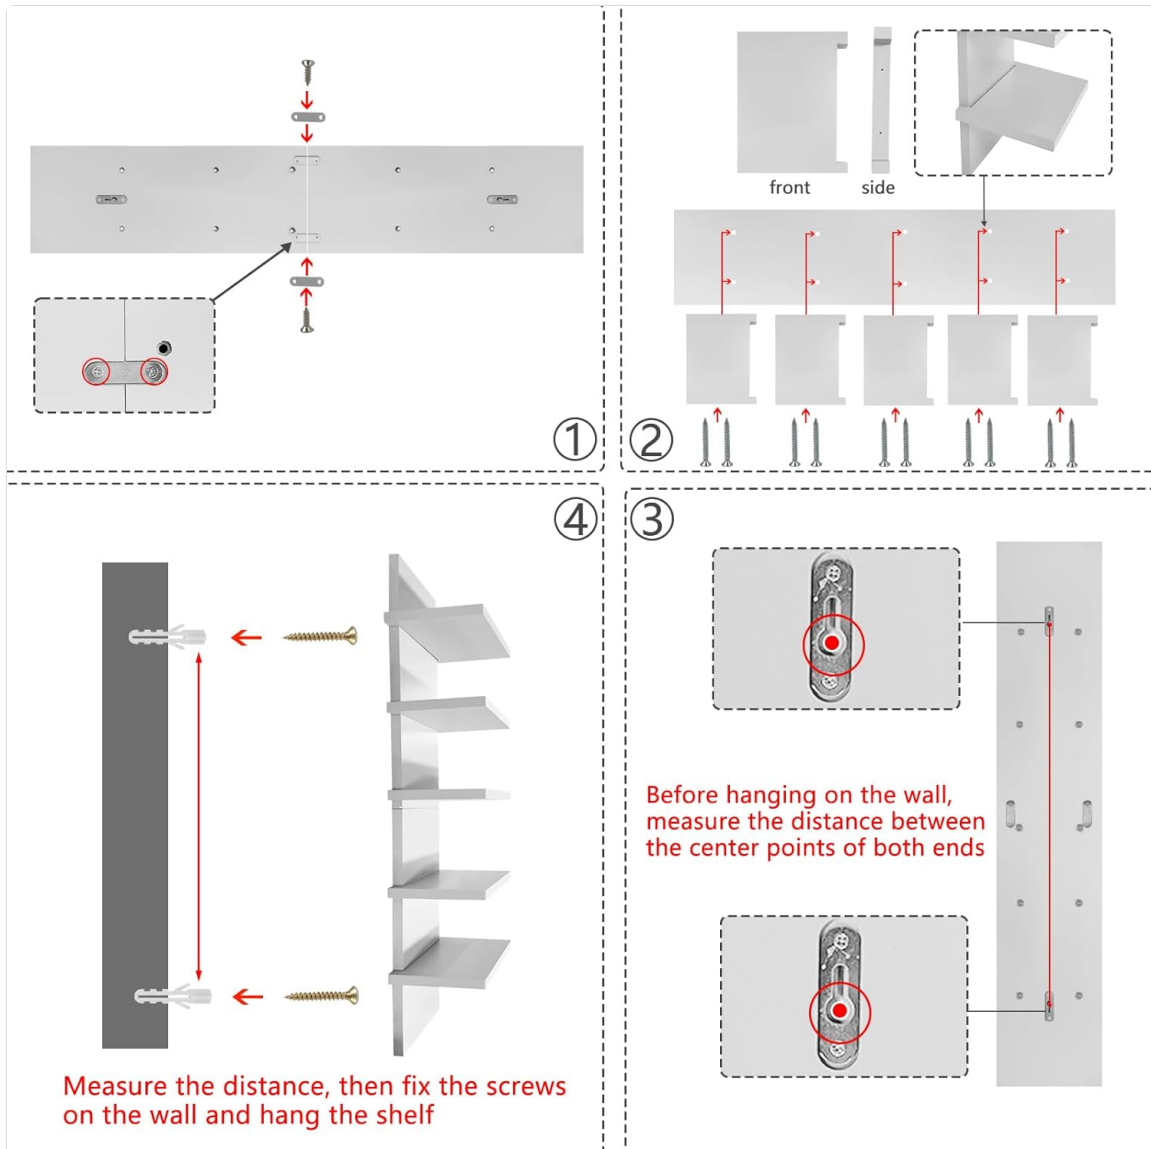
Assembly Steps. This diagram illustrates the process of attaching the shelves to the main back panel and the subsequent wall mounting procedure.
